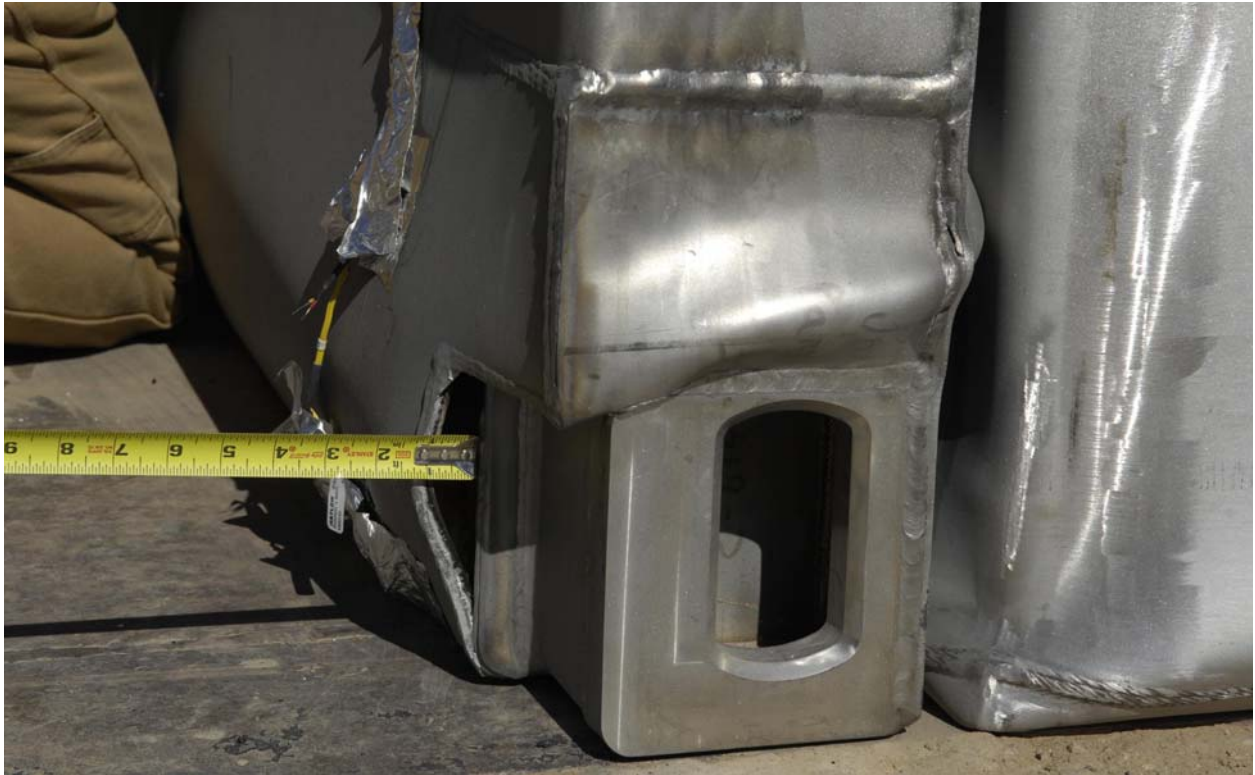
Test LD2, Close-up of Deformation and Torn Welds Around ISO Fitting
